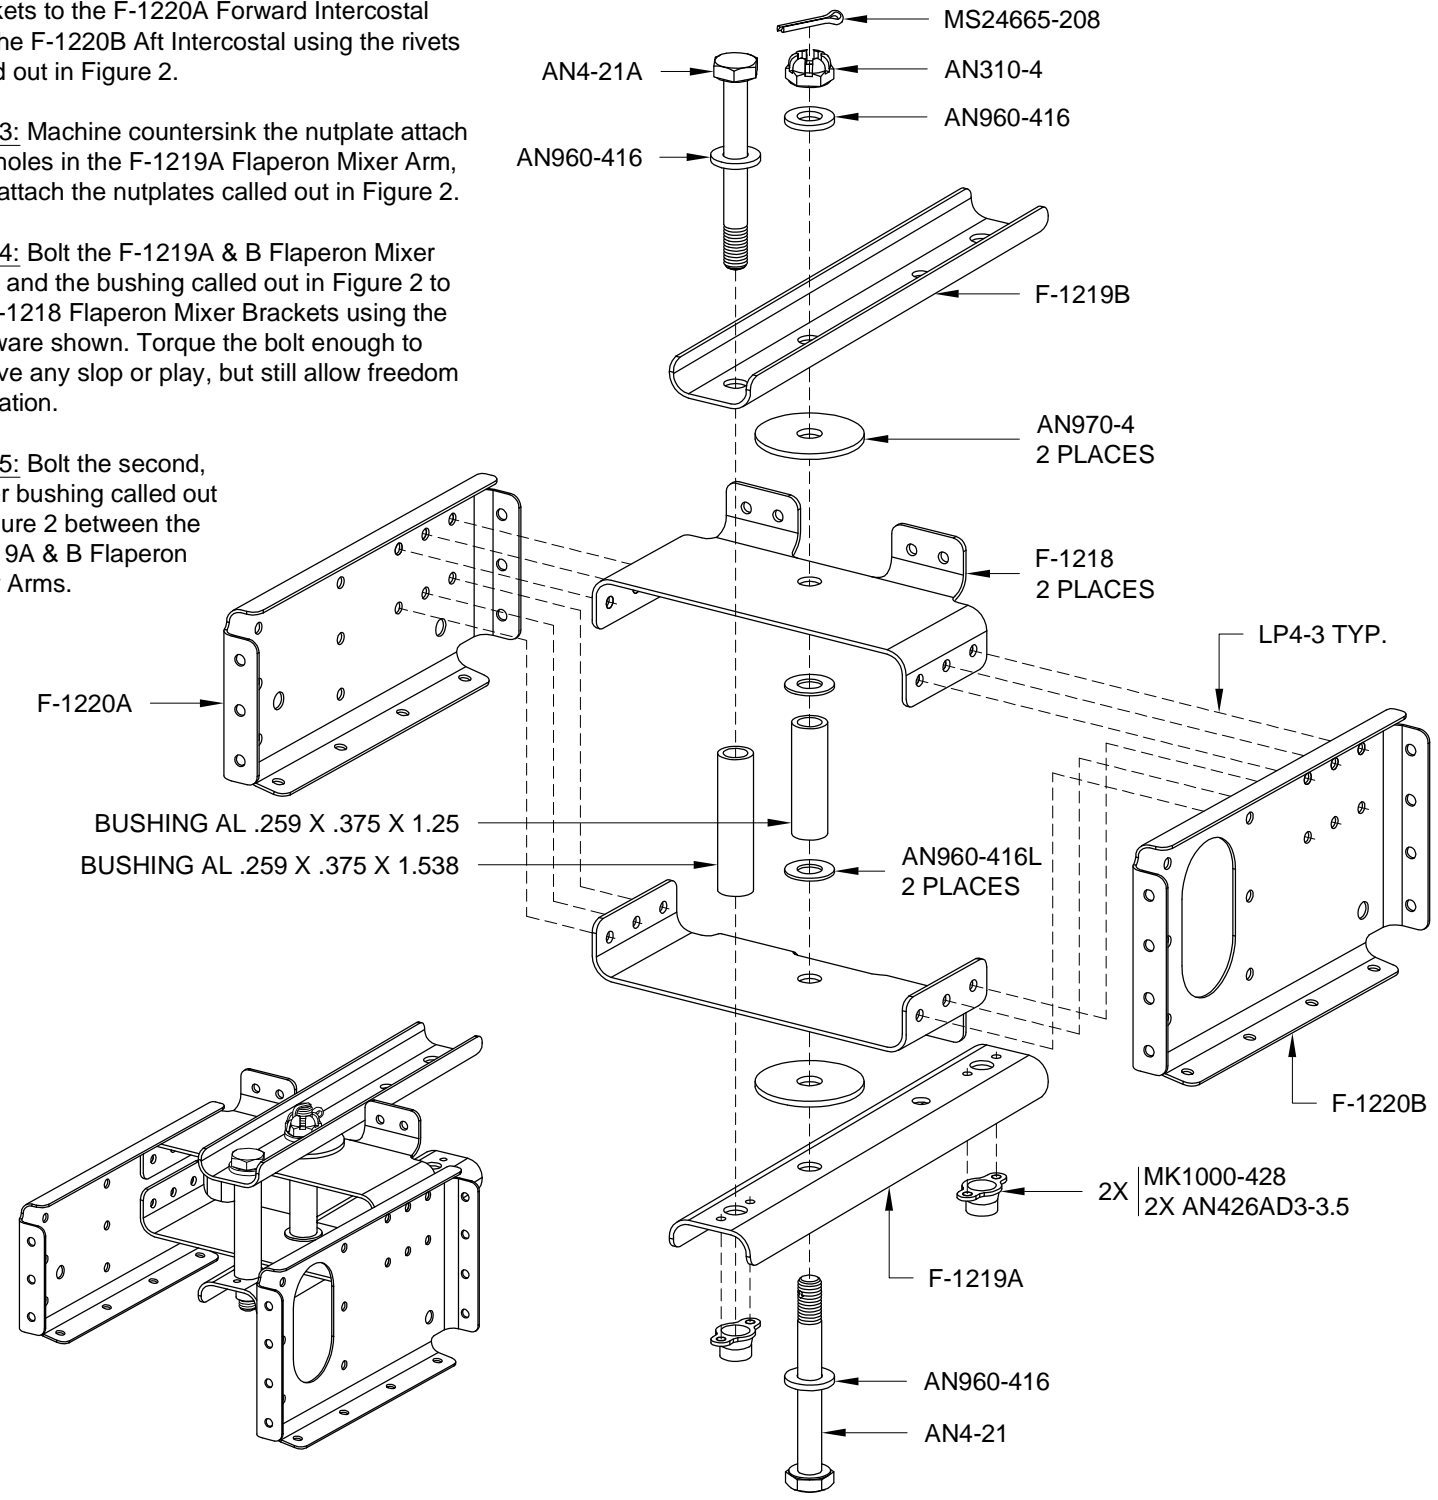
FLAPERON MIXER ARM ASSEMBLY
